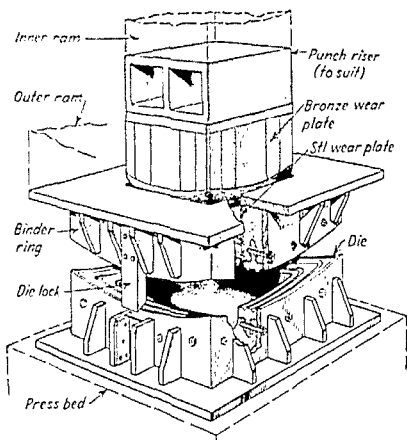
Draw die with plastic working surfaces for low-production parts.¹⁷
